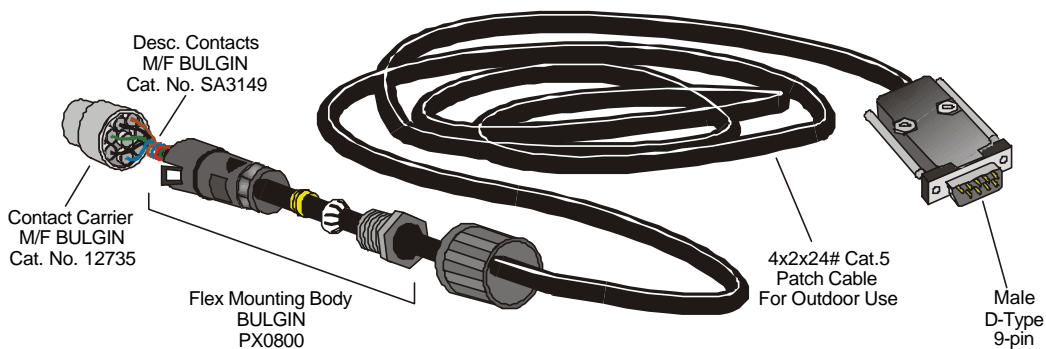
Assembling the Indoor-Unit-to-Outdoor Unit Baseband Cable
